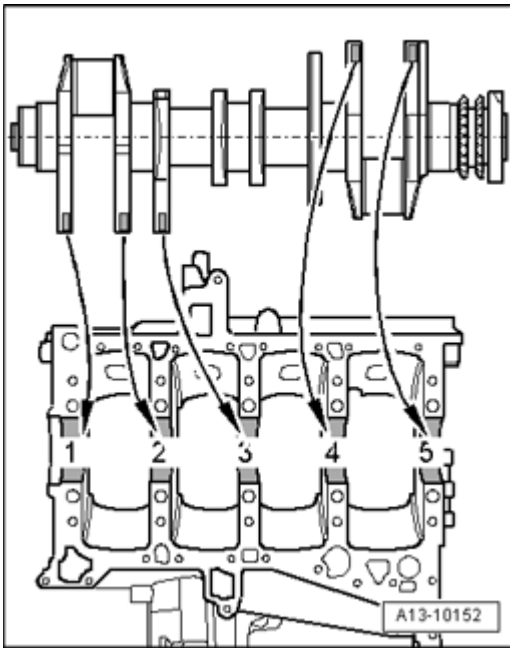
Allocation Of Crankshaft Bearing Shells For Guide Frame - Crankshaft Manufactured By Alfin
